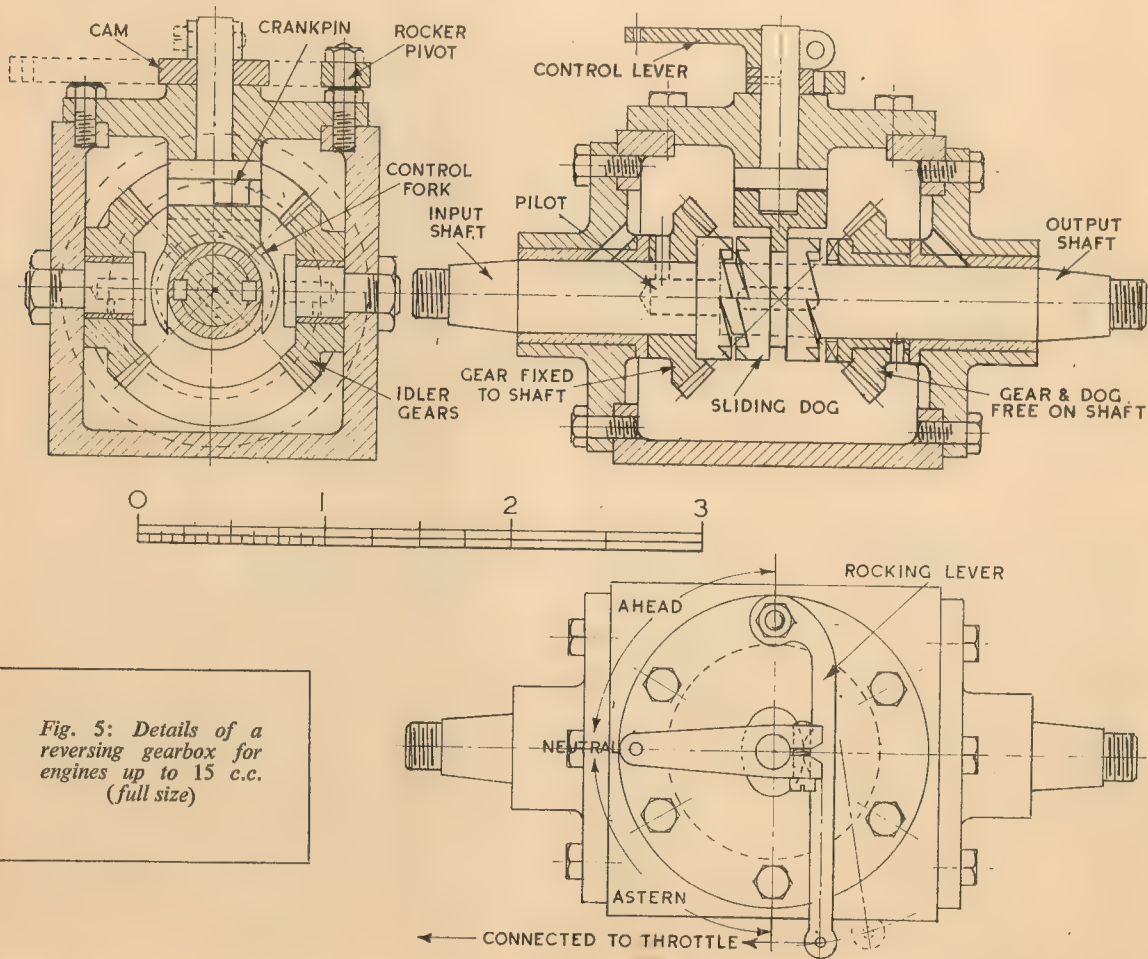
Details of a reversing gearbox for engines up to 15 c.c. (full size)
